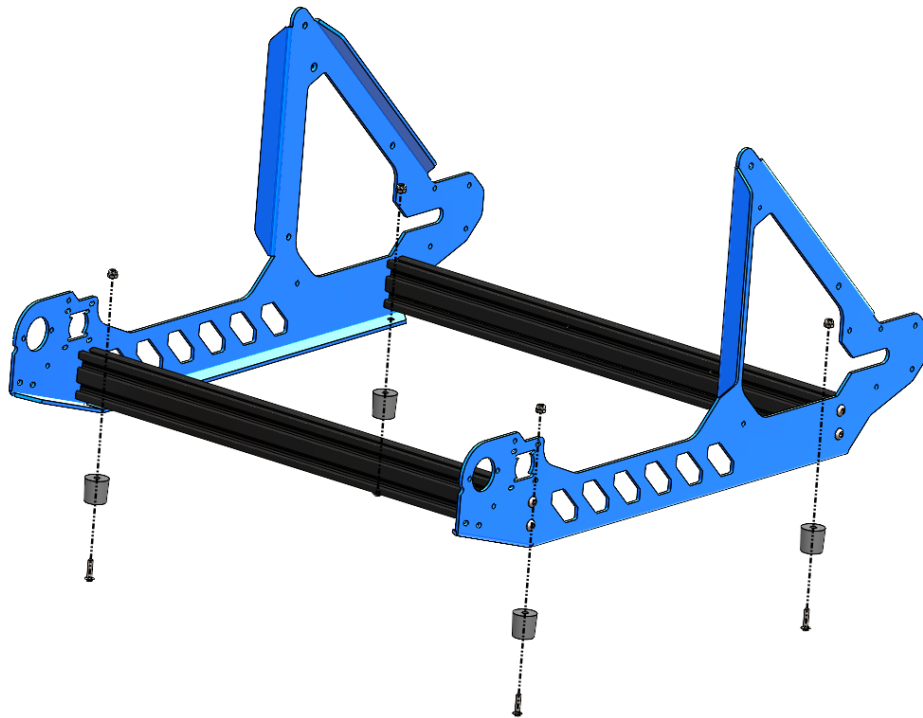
Using 04 units M4x16 screws and Nylock nuts to fix rubber feet at the bottom part of the frame
